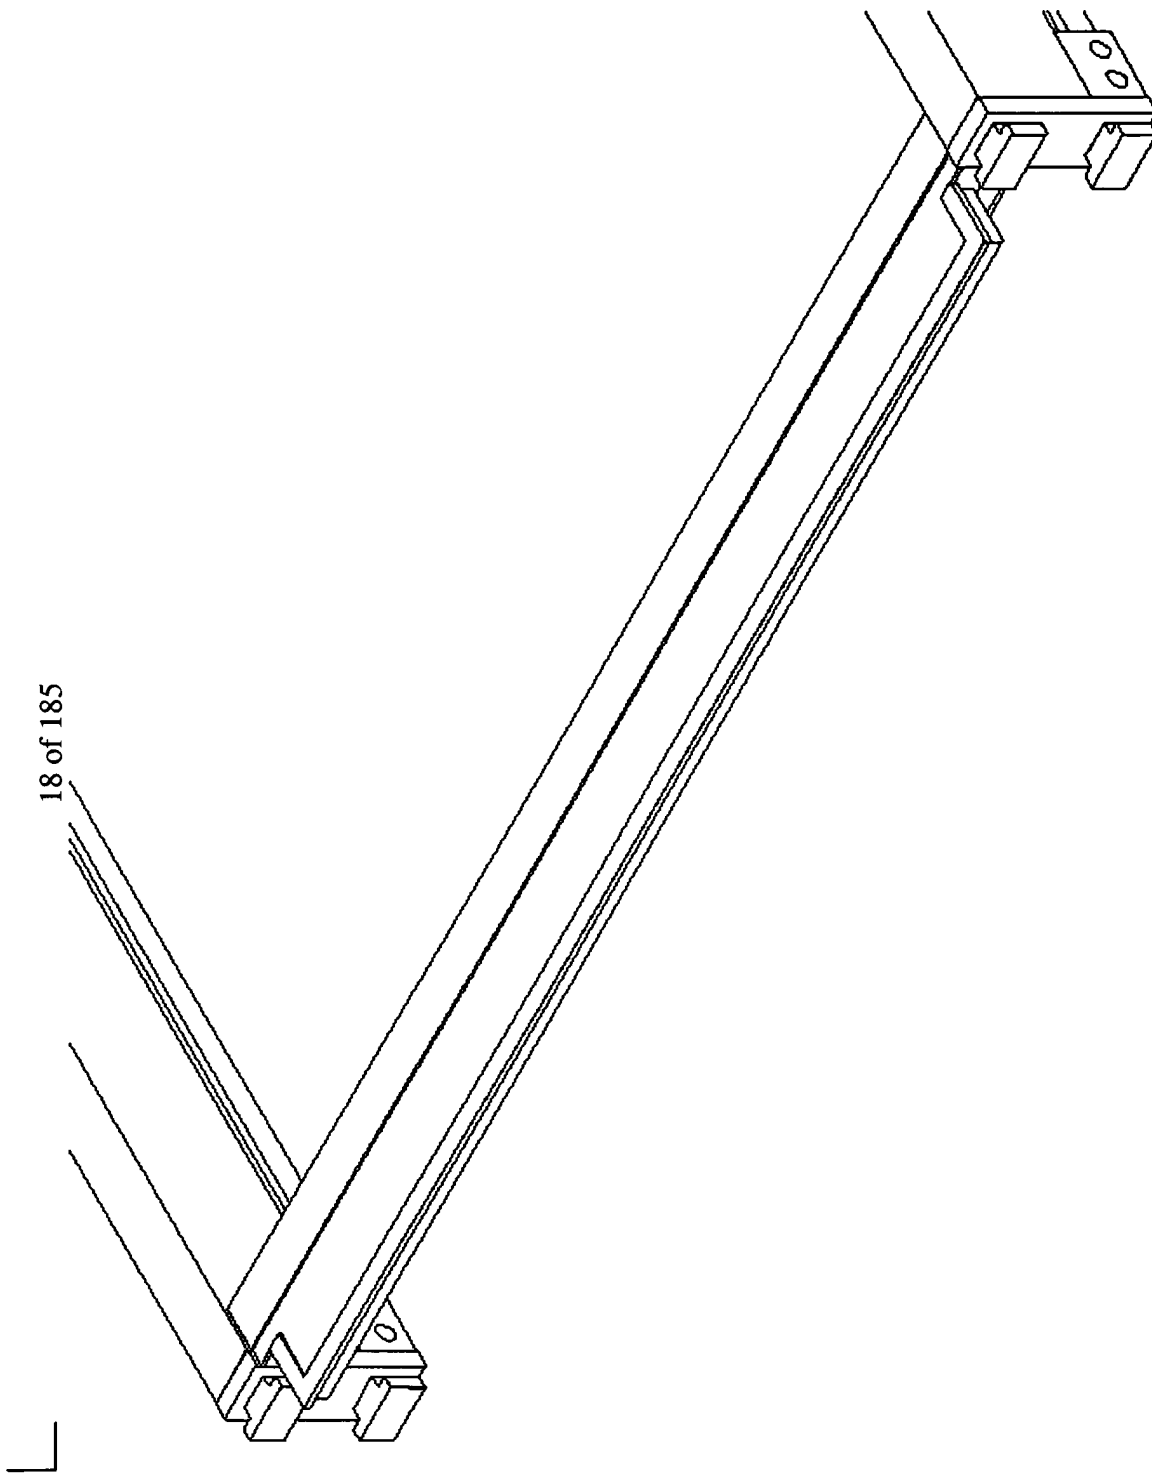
A: Isometric view of the right end of a ceiling frame (40 foot collapsible cargo container)
